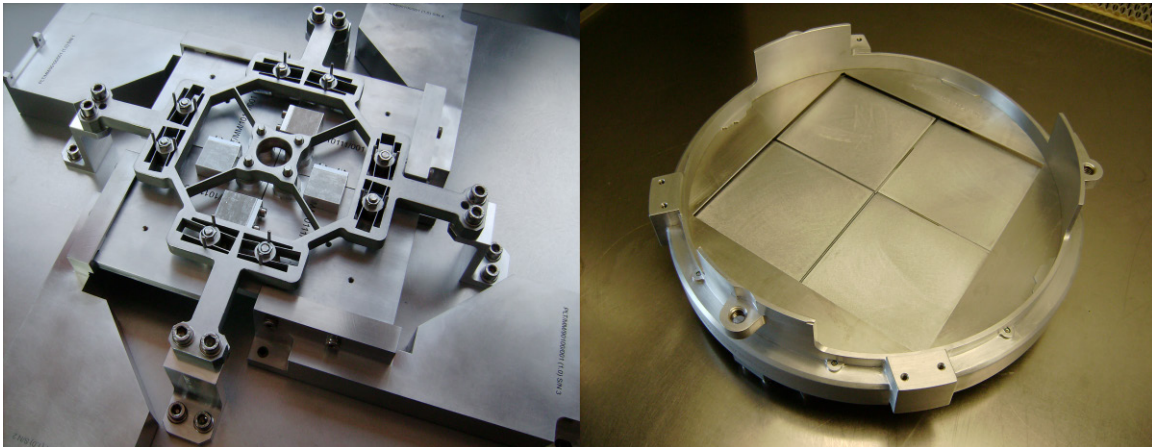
The Focal Plane Assembly mock-up. Left, CCD support structure; right, top view with 4 dummy CCDs.
